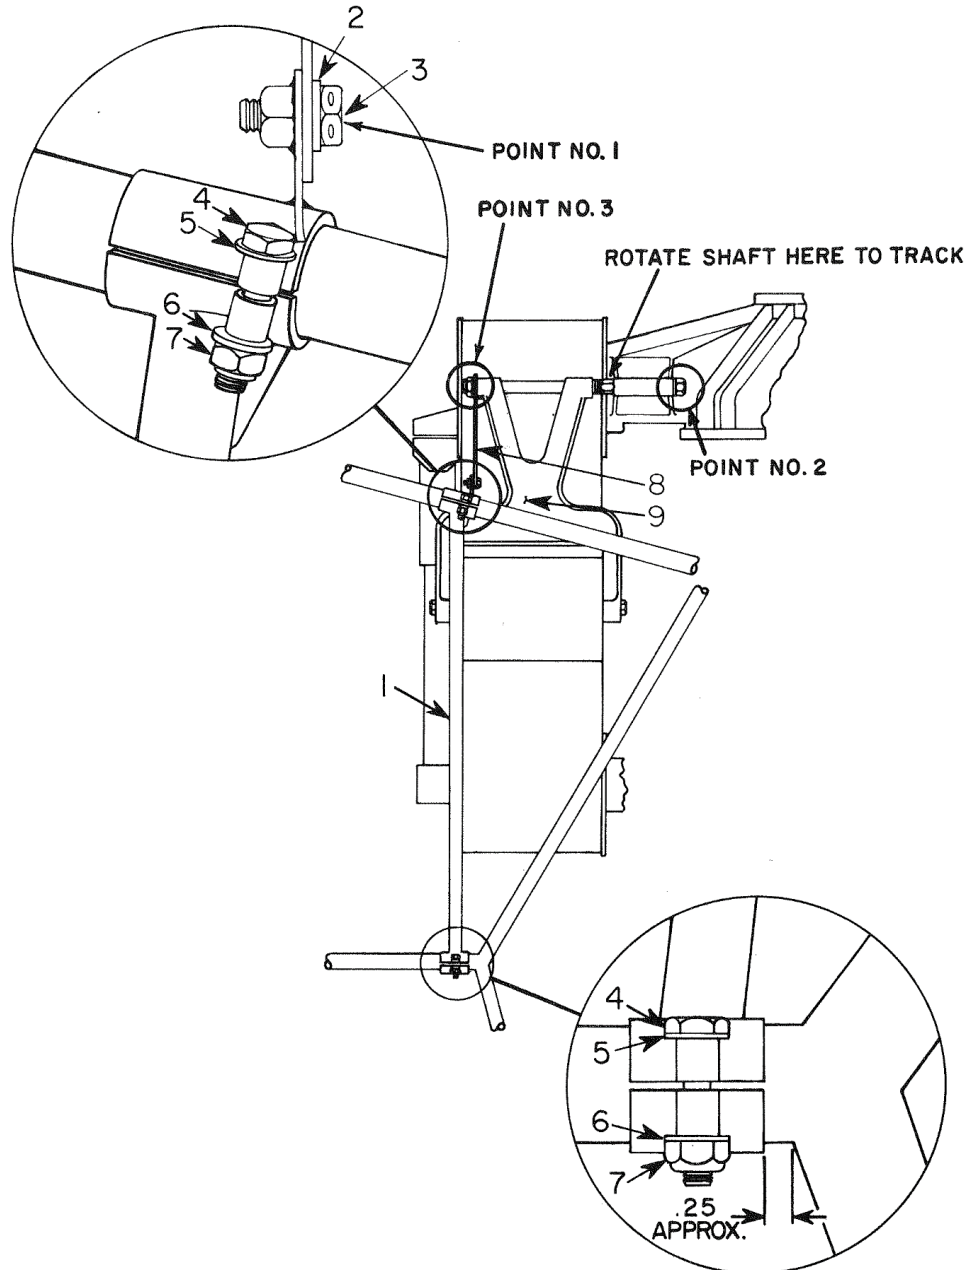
Idler Stabilizer and Belt Tracking Adjustment Points
